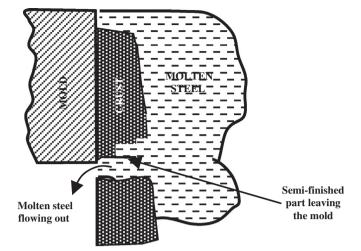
Breaking of the semi-finished part and out flowing of the molten steel.
